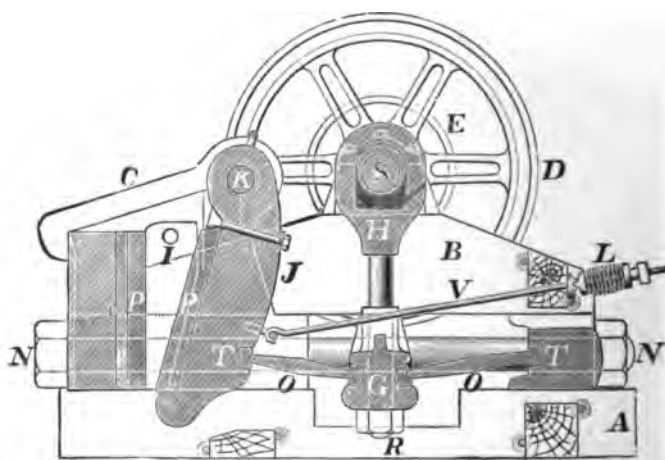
THE BLAKE CRUSHER. SECTIONAL VIEW.
